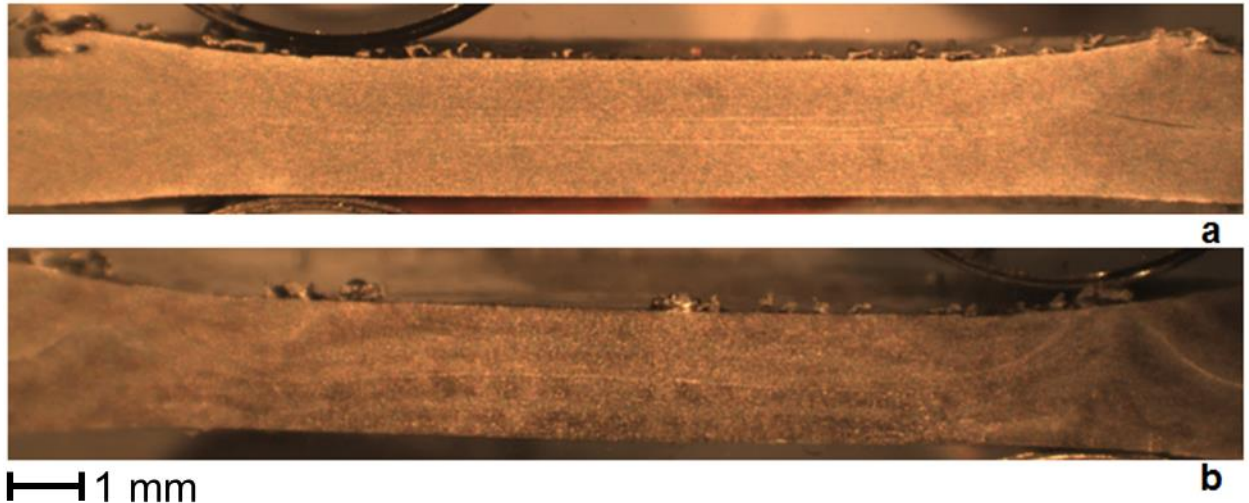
Macrosection image of spot welds made using the RAFSSW process. Spot weld created at a) 750 rpm (welding tool and anvil) and a 0.5 second dwell phase and b) 1500 rpm and a 0.5 dwell time. A hooking defect can be seen on the left and right side of the 1500 rpm spot weld macrosection.
